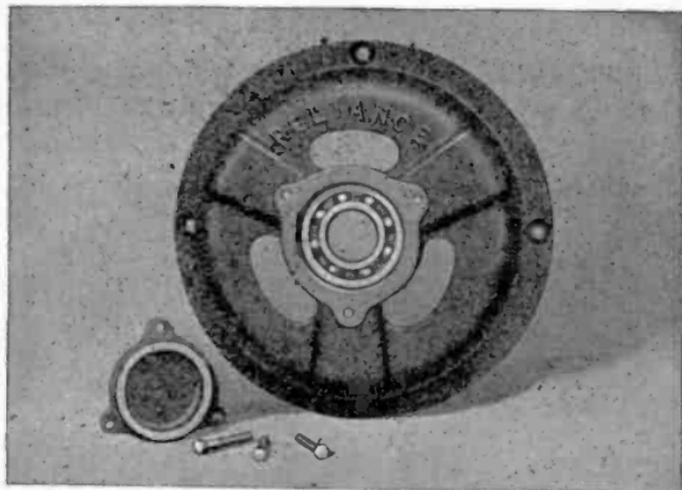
,531 to 2,535.—*Reliance induction motor construction 6.* Bearing bracket with outside bearing cap removed. Bearings are interchangeable for both ends of the motor.
